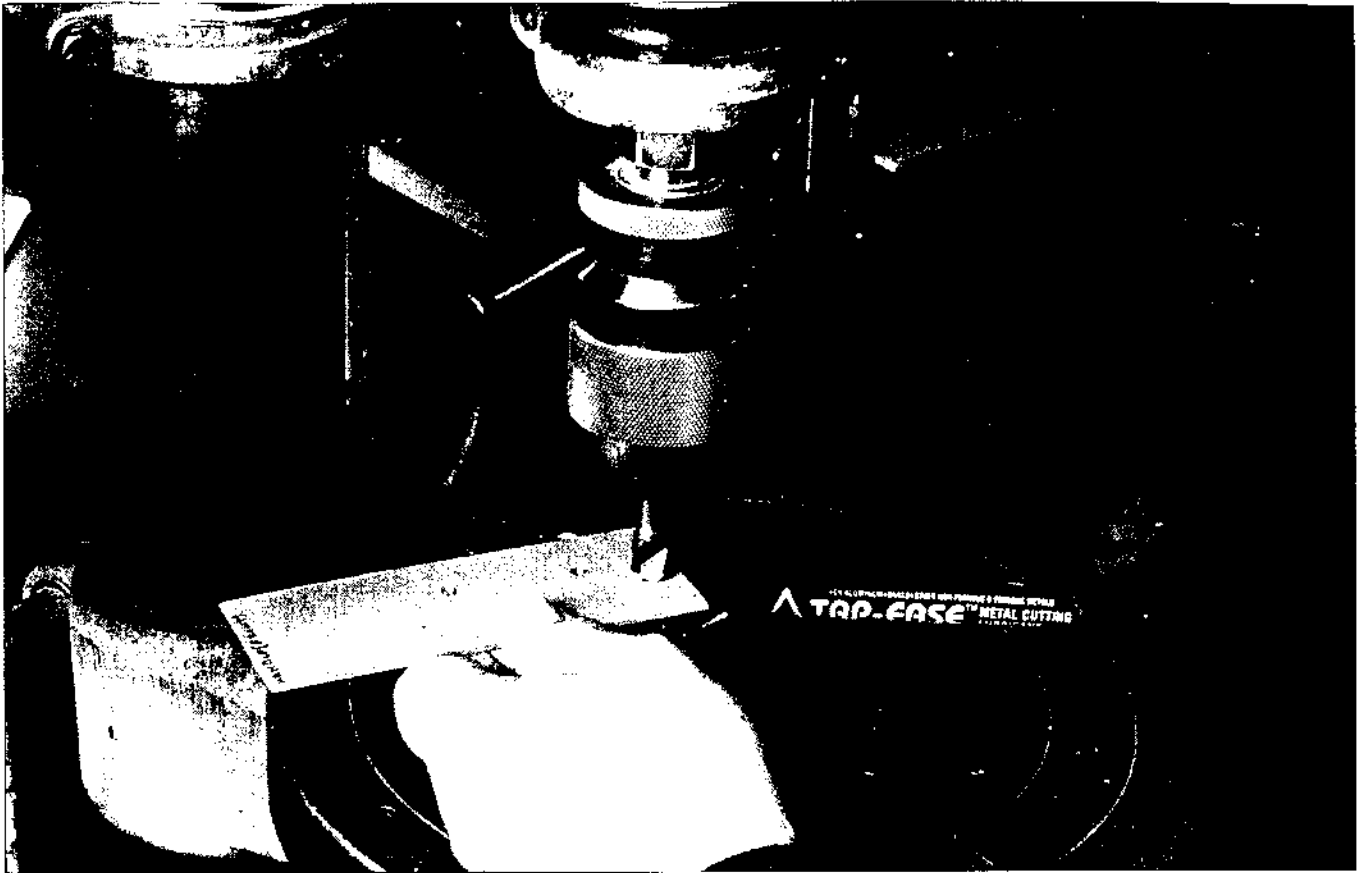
Countersink the screw holes in the front handle side for 1-72 flat head screws
